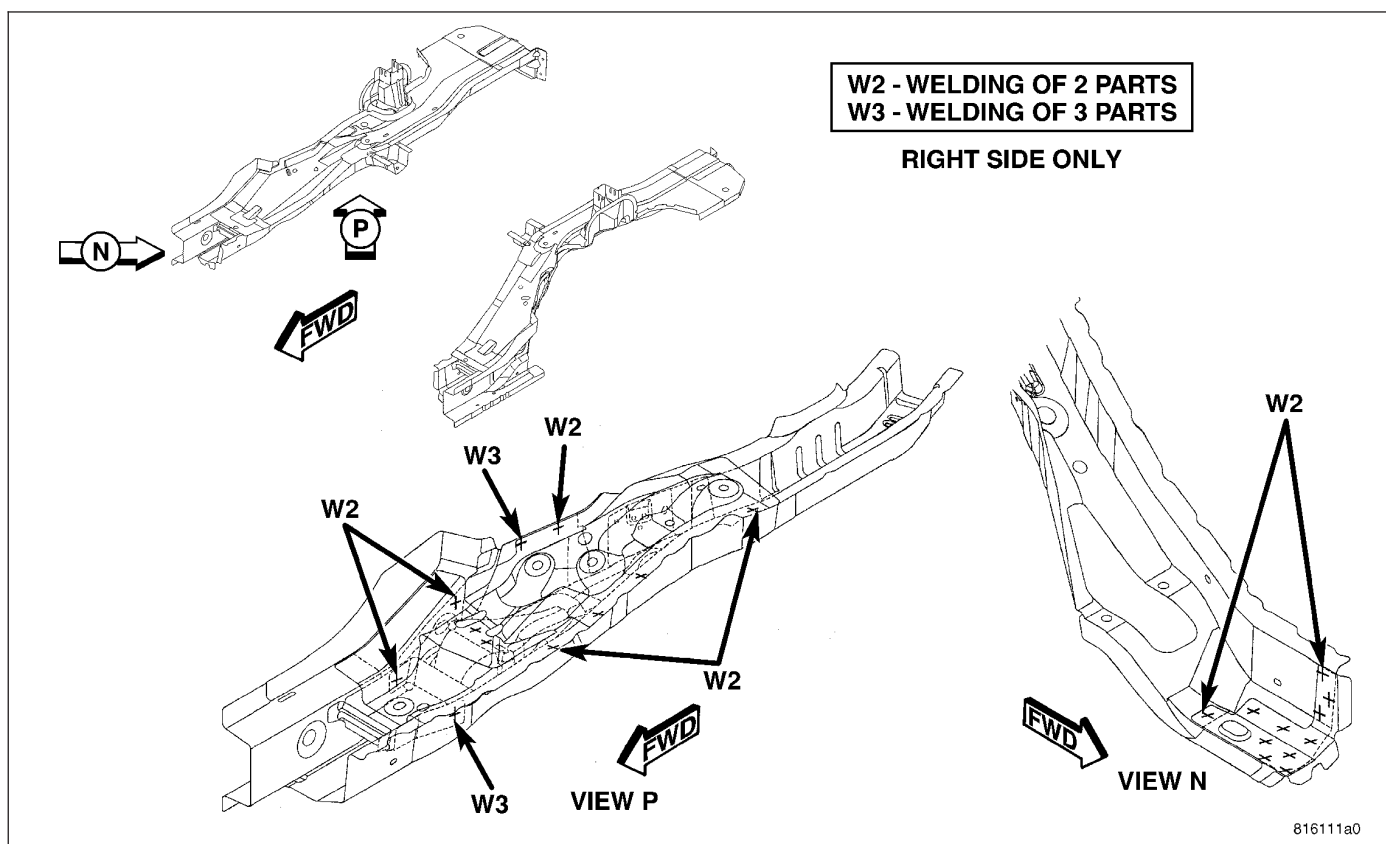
SIDEMEMBER ASSEMBLY (6 OF 17)
